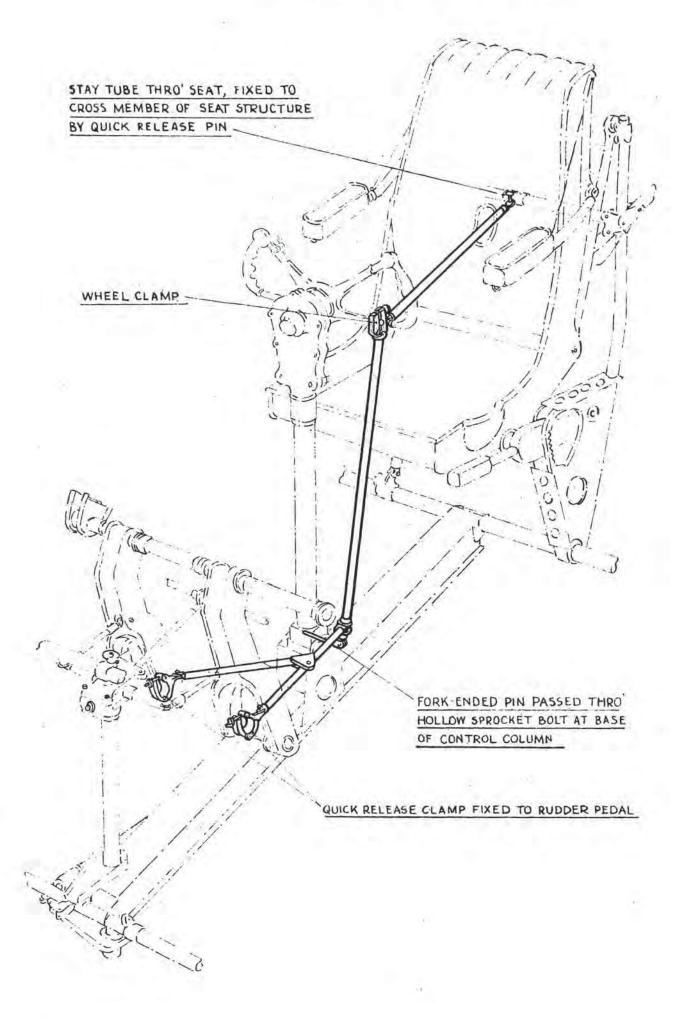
FLYING CONTROLS LOCKING GEAR.
